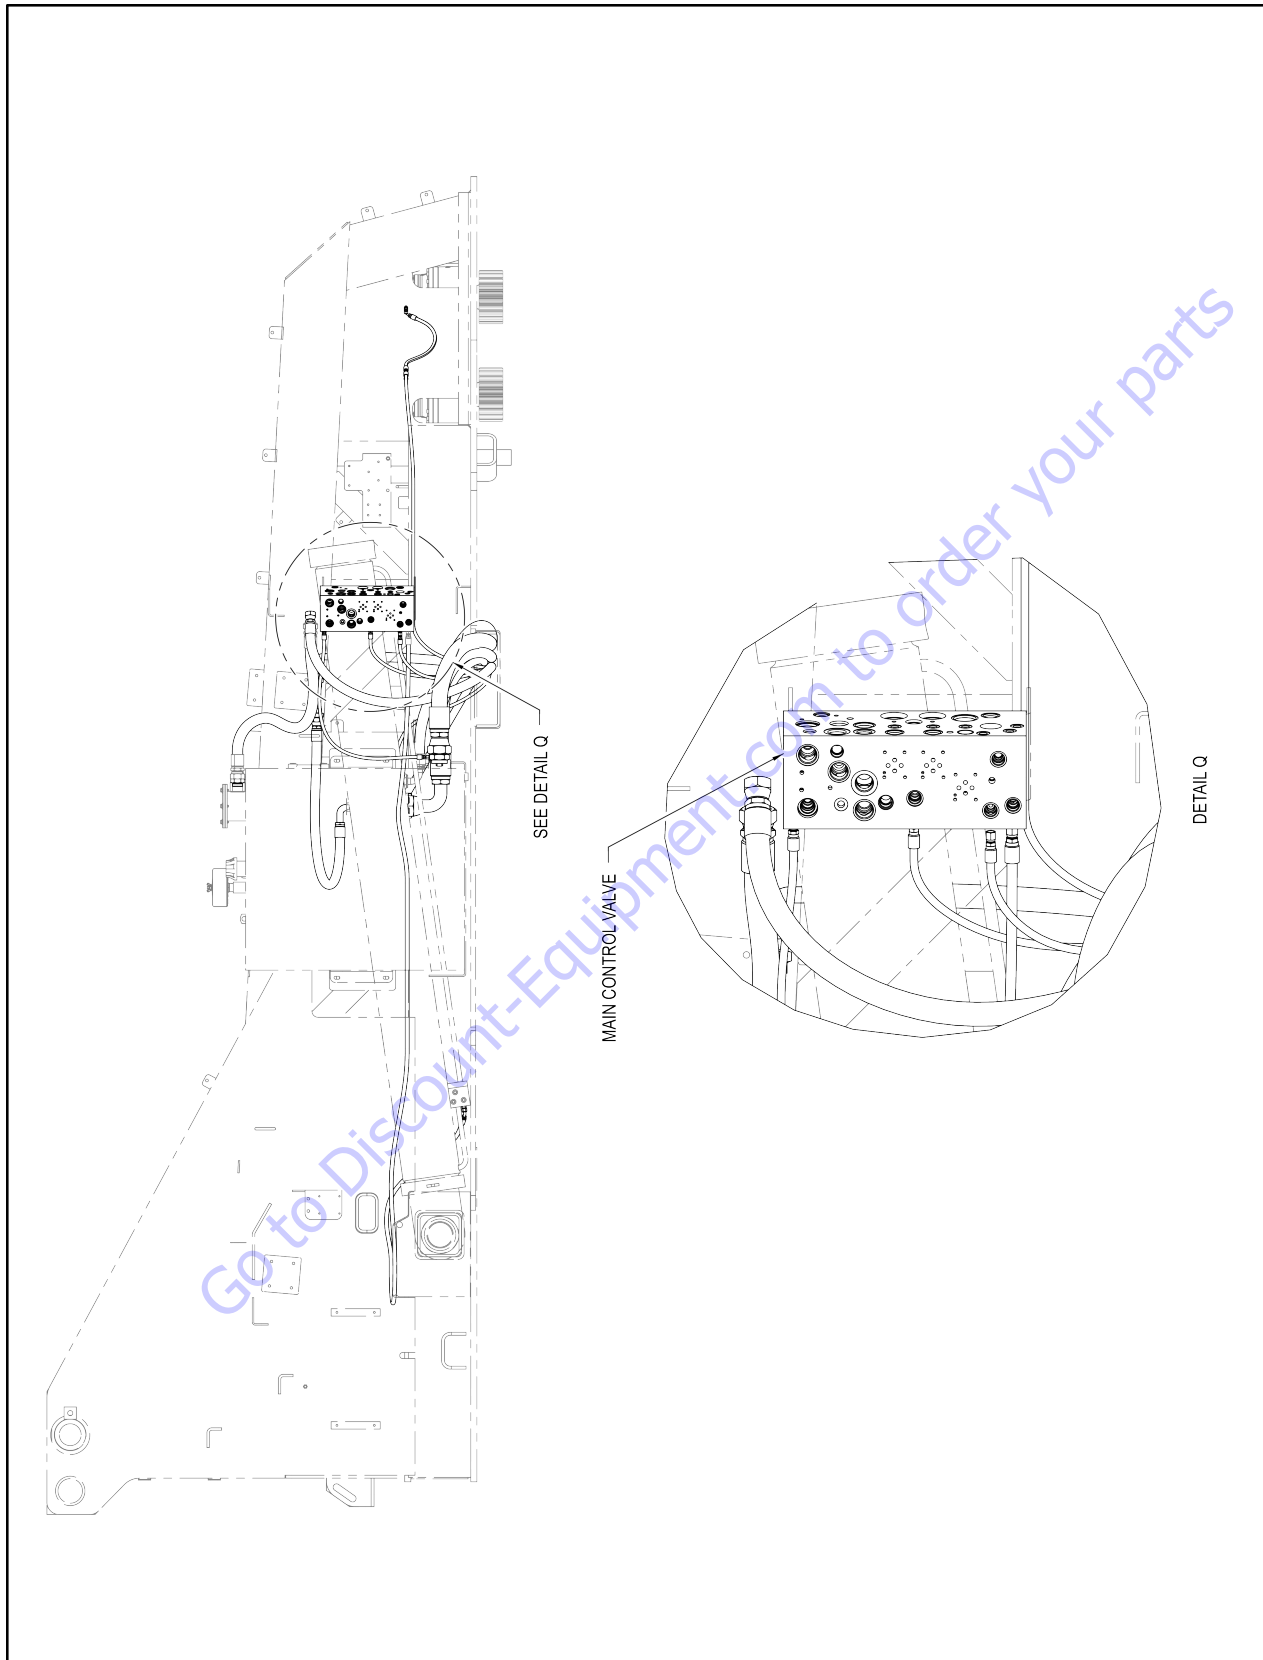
Hydraulic Hose Installation - Sheet 4 of 8
